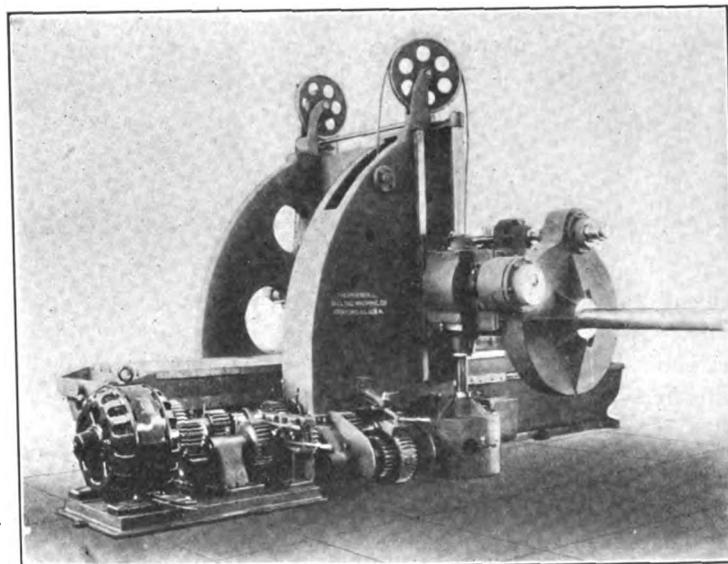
MILLING MACHINE WITH ALTERNATING-CURRENT MOTOR AND GEAR.
